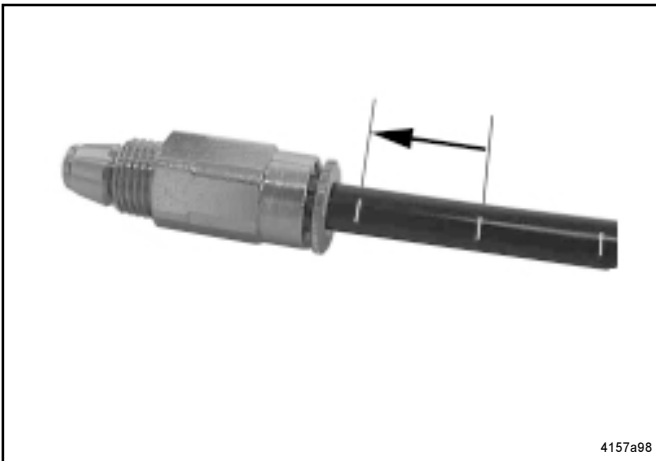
Check valve with knurled collet and pressure plastic tube
